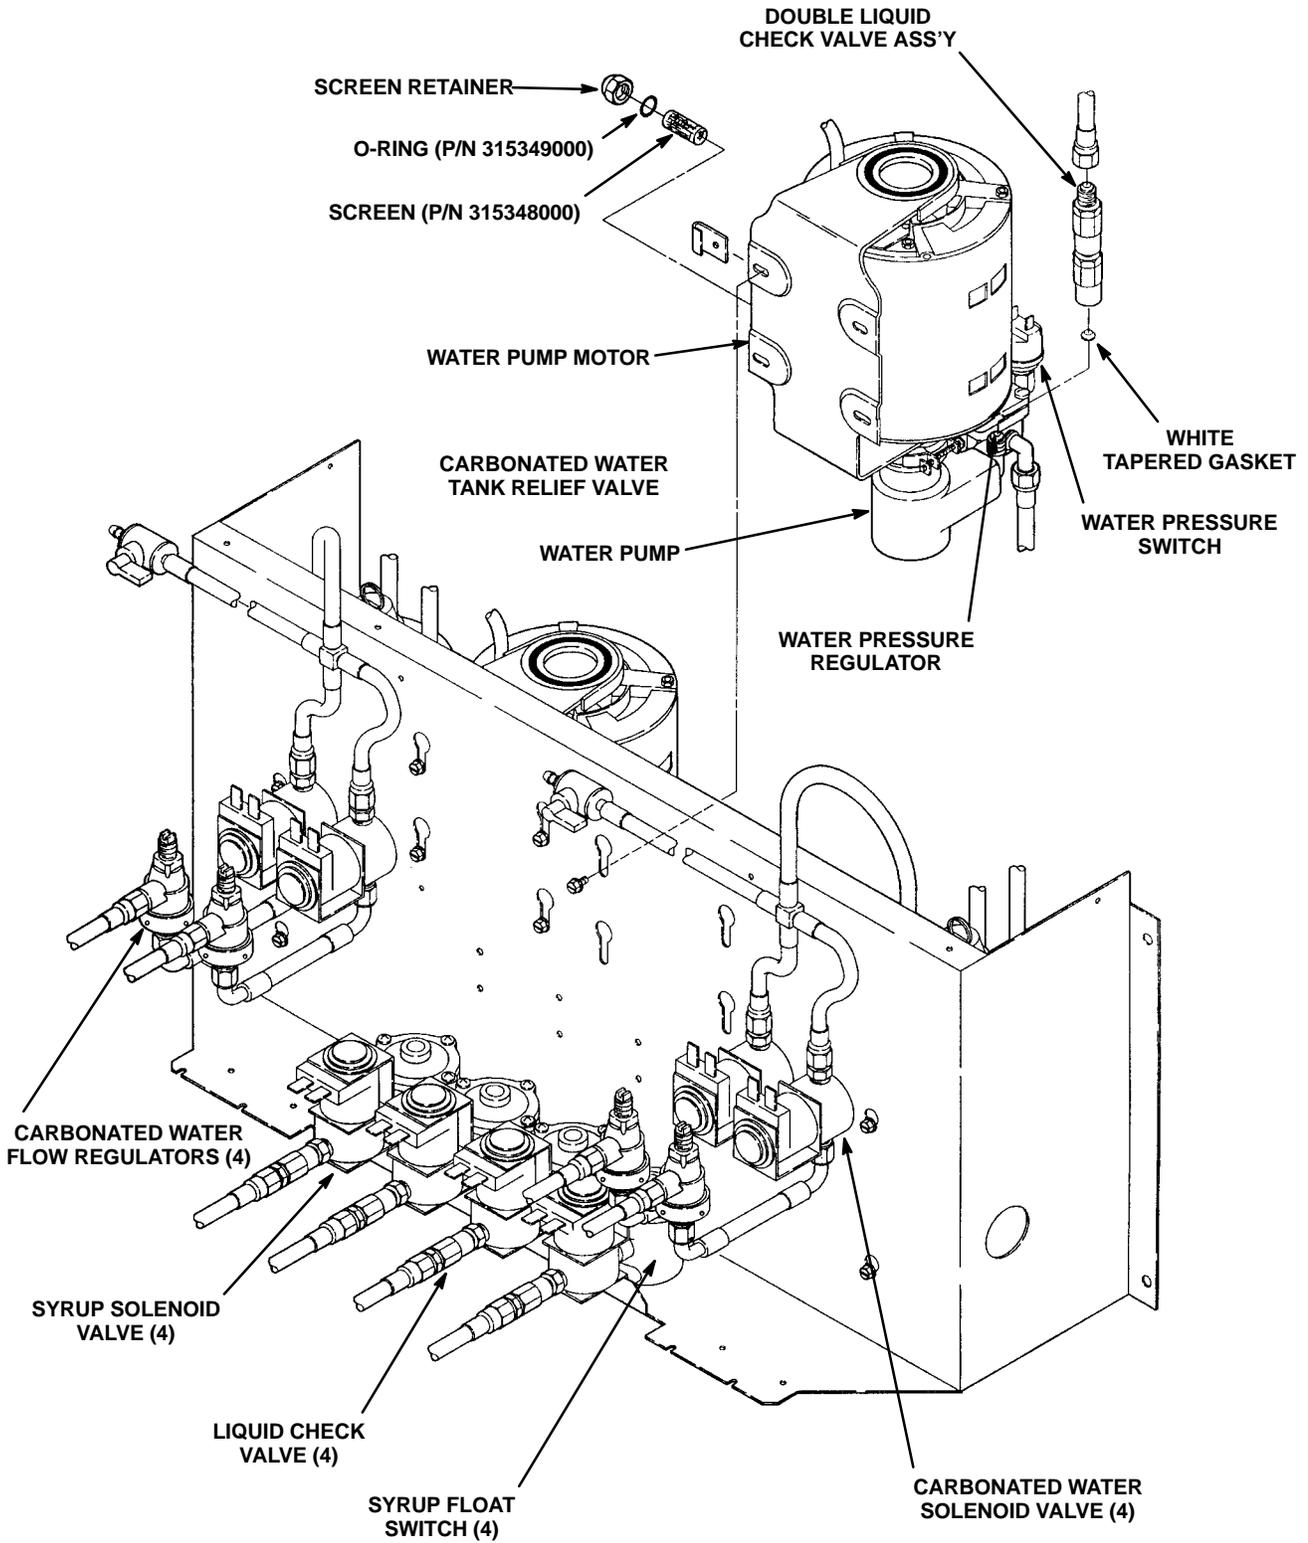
WATER STRAINER SCREEN AND DOUBLE LIQUID CHECK VALVE
